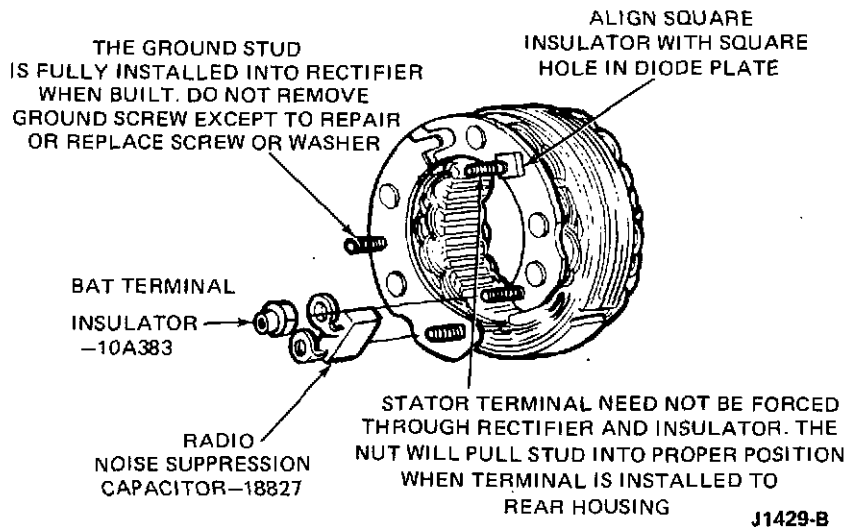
Terminal Insulators - Fiber-Glass Circuit Board
